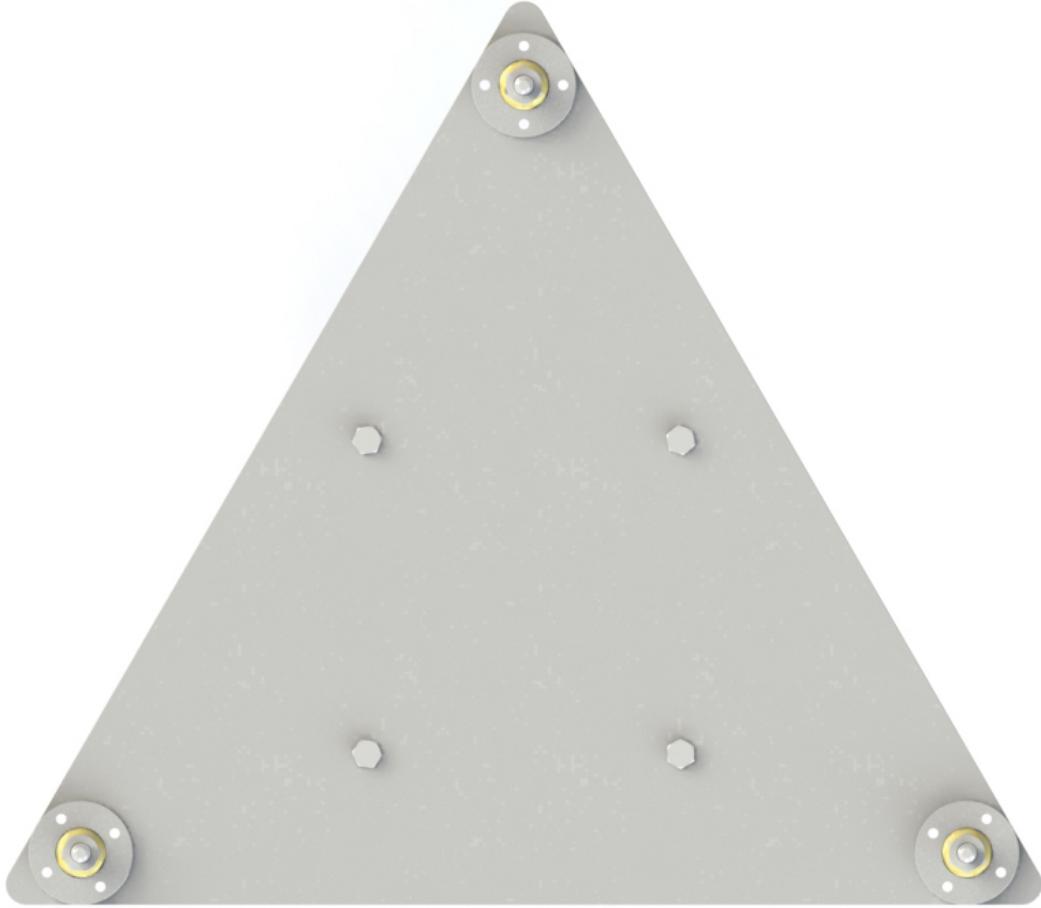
Top view rendering of the flange assemblies on the platform. The KUKA robot is mounted via the four M8 bolts in the center.
